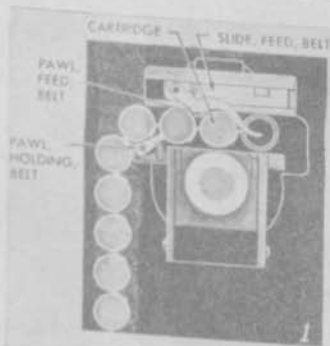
Action of belt feed pawl, bolt completely forward.
